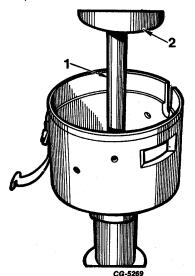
Pressing Out Lower Bushing Using Knock-Out Bar
